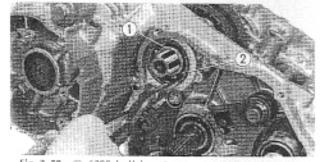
① 6205 ball bearing ③ 52 mm internal circlip
